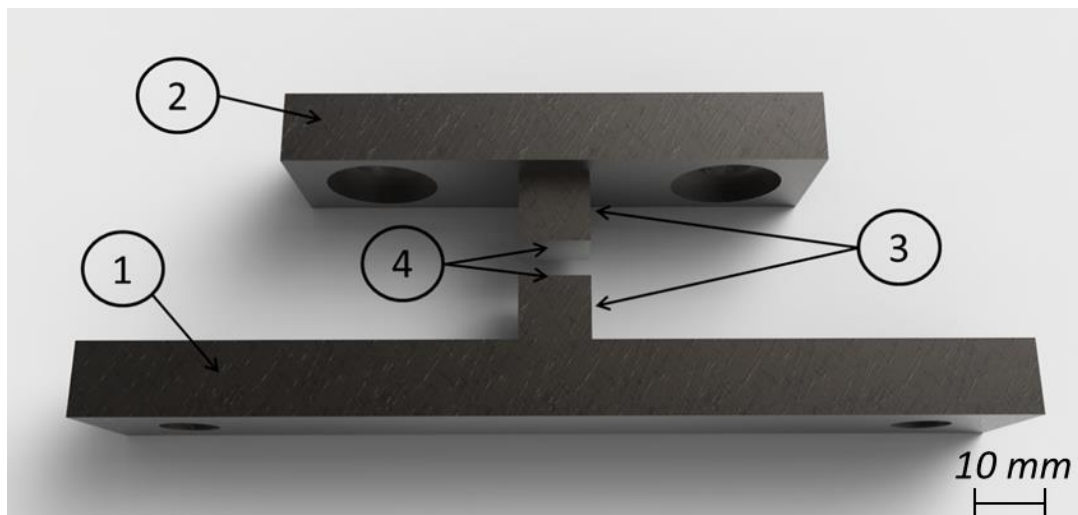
1-2) base to be fixed to the machine 3) specimens to be welded 4) welding interface.
